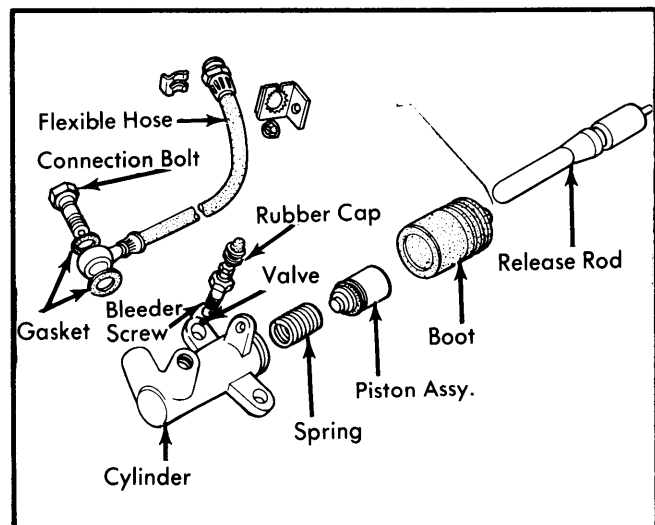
Exploded View of Adjustable Type Slave Cylinder. Only 808 (1300 cc) Uses this Type of Unit.
